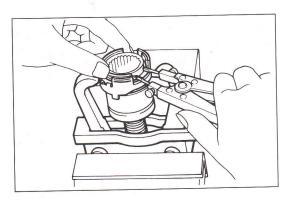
Snap-ring pliers being used to expand joint spring slightly. Over-expansion may damage spring.
